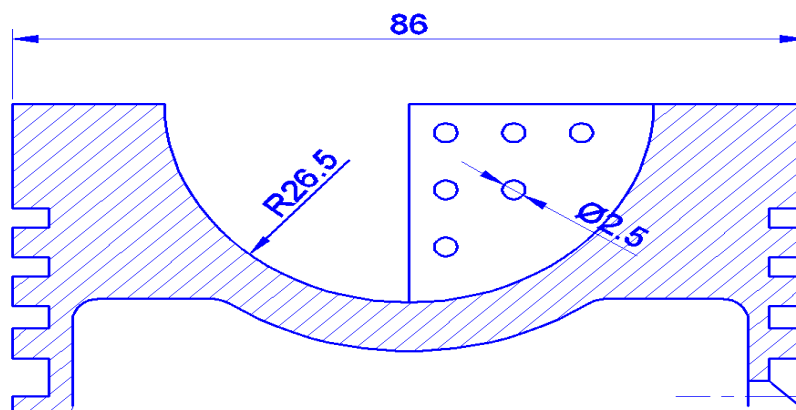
Dimensions for swirl blade combustion chamber (P2)
